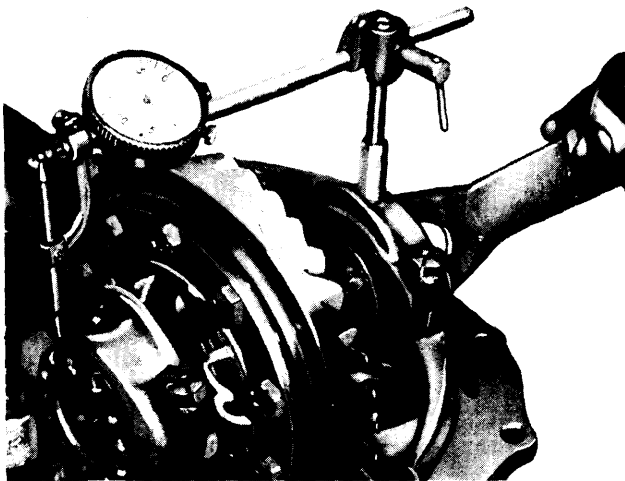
Dial Indicator Installation to Adjust Bearing Preload
